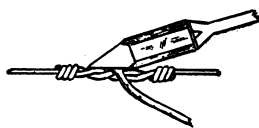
The correct method of applying cored solder. To accomplish a securely soldered joint, the best and easiest way is to apply the solder directly to the heated surfaces of the joint.
